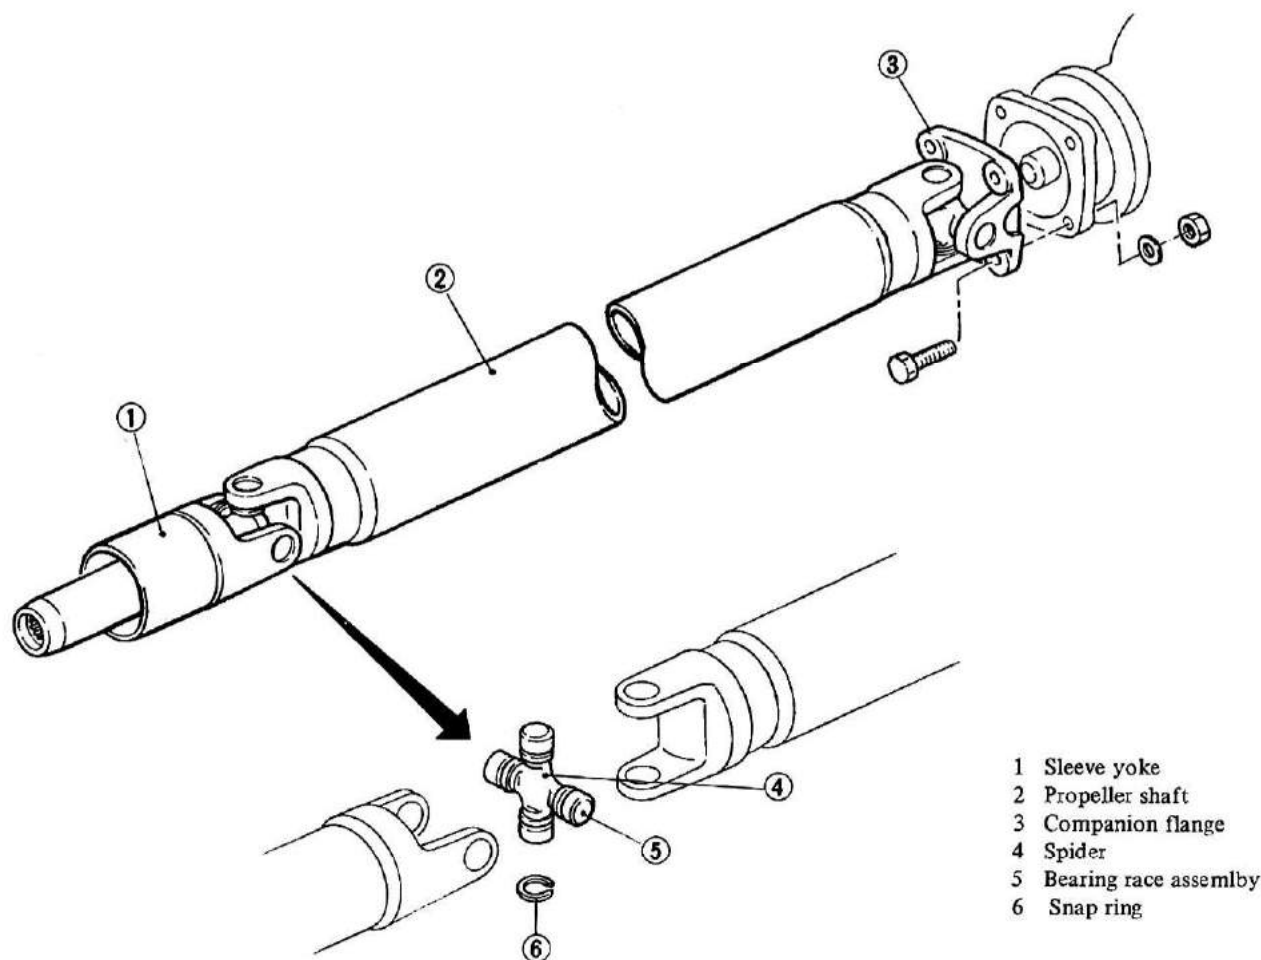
2-joint type propeller shaft for H20 and SD22 engines
